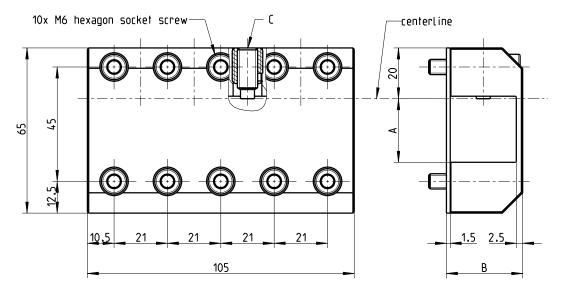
Tool holder for lathe chisel for axially mounted dynamometer, Type 9129AE...
